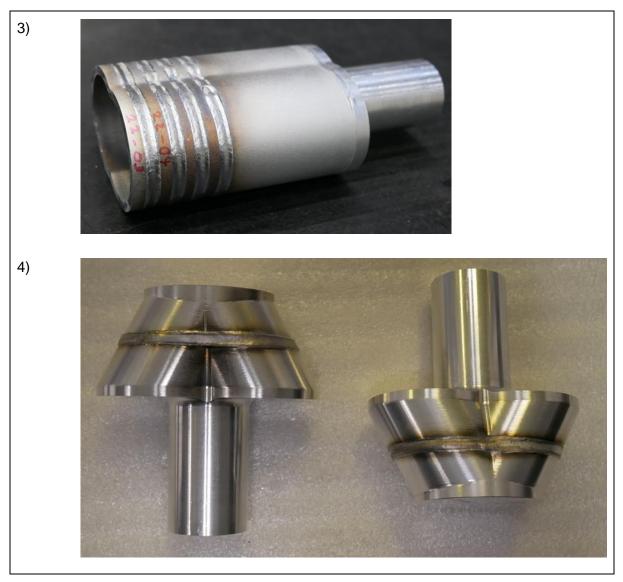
Welding samples for the hydrogen vessel
